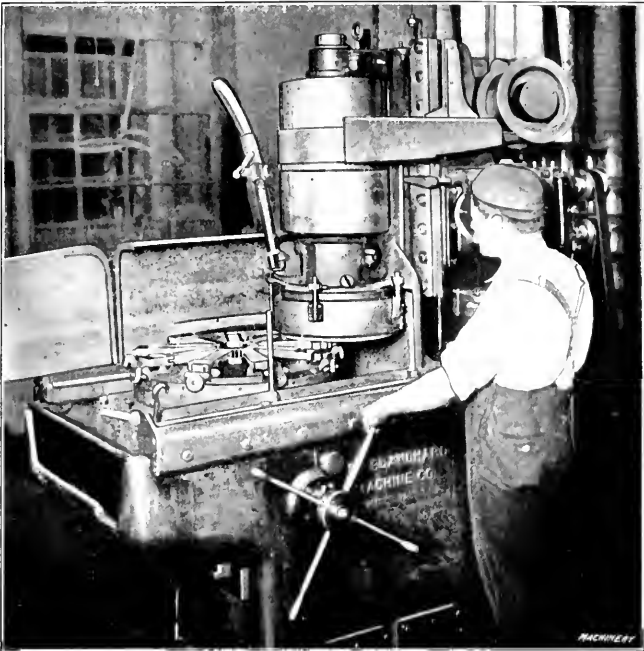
Facing Forgings on a Vertical Surface Grinder
